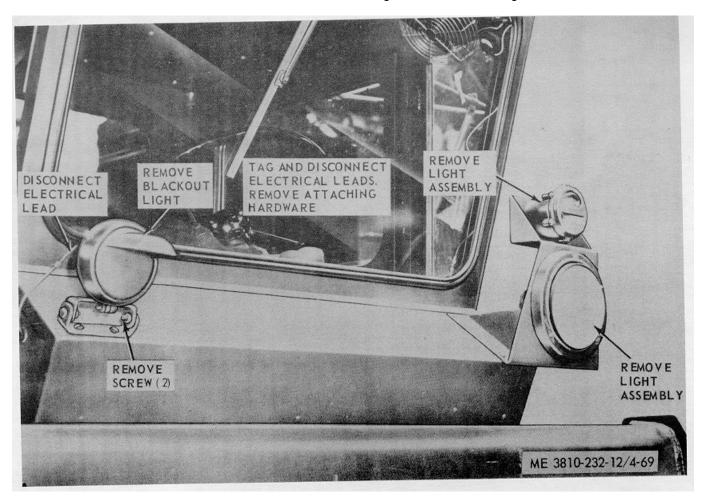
Marker, blackout and headlights, removal and installation. (Model 2380).
